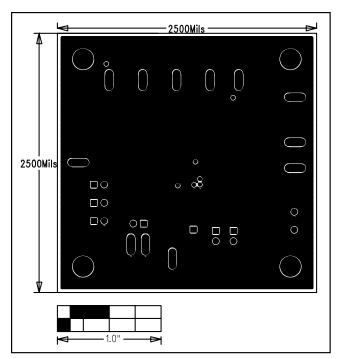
MAX8677A EV Kit PCB Layout—Layer 2
